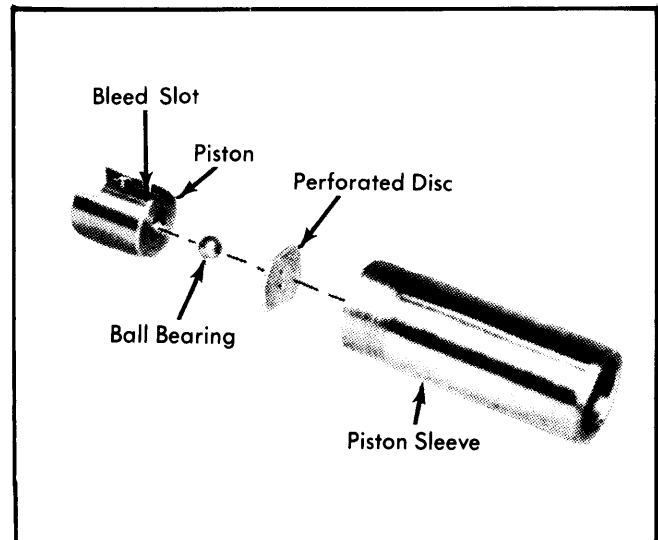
Exploded View of Chain Tensioner Piston Assembly
